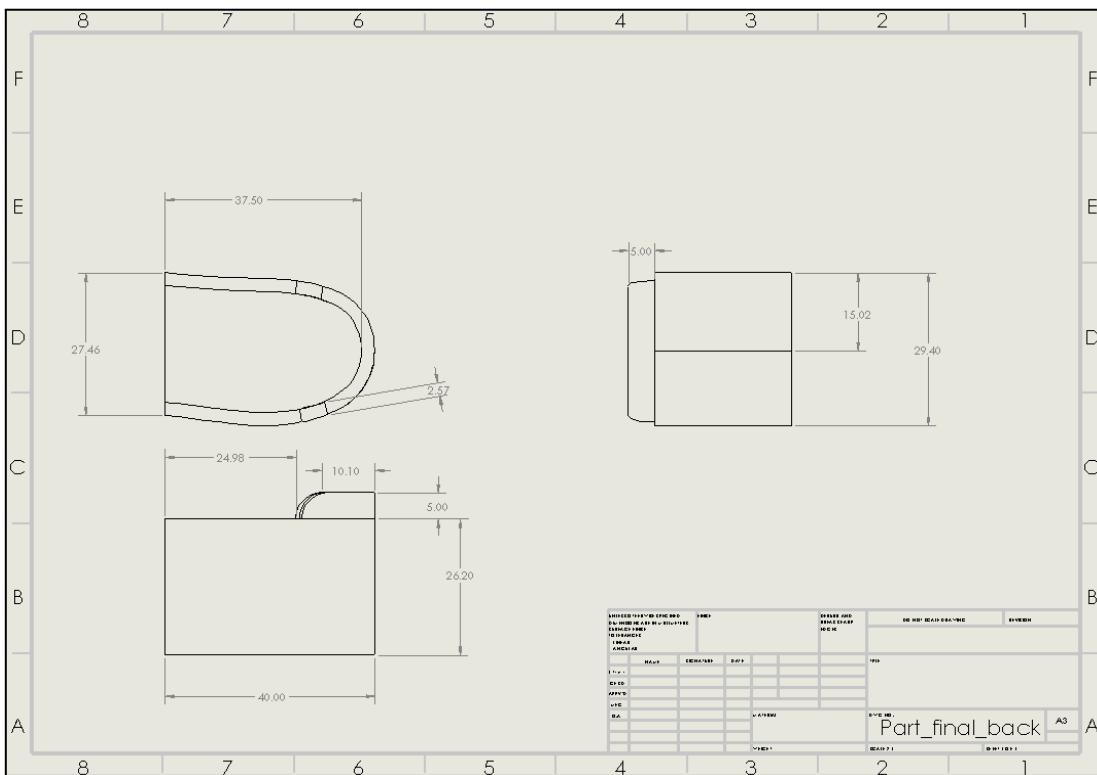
CAD Projection of the Posterior Shoe Component (Component 2)
